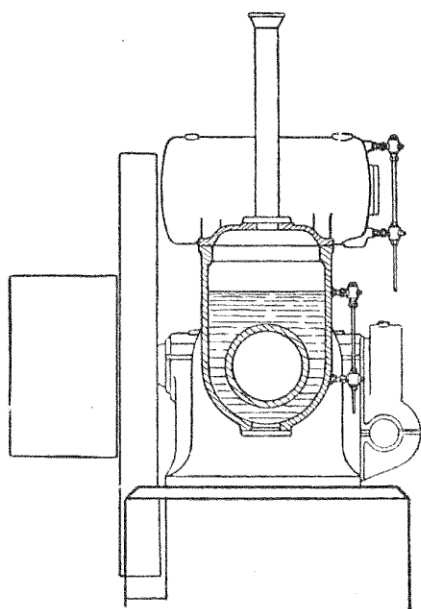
Deutz liquid-fuel engine fitted with evaporation cooling jacket. (Section.)
